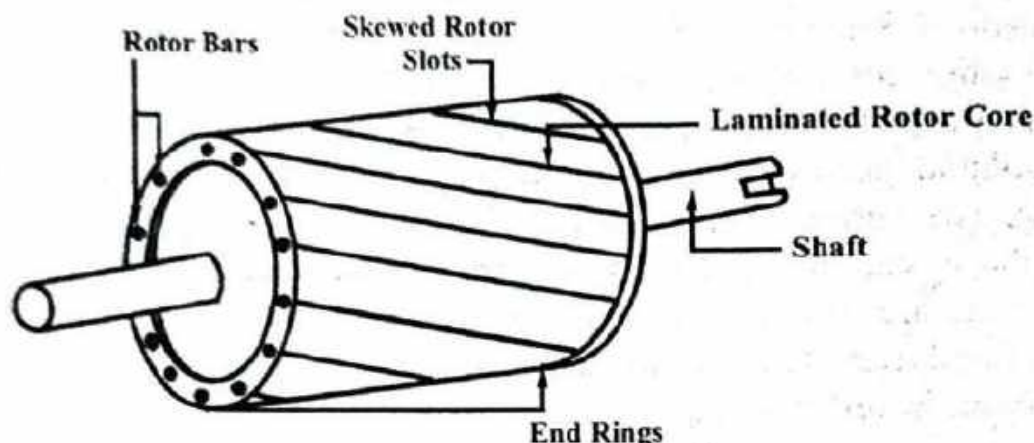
Construction Details of Squirrel Cage Rotor
